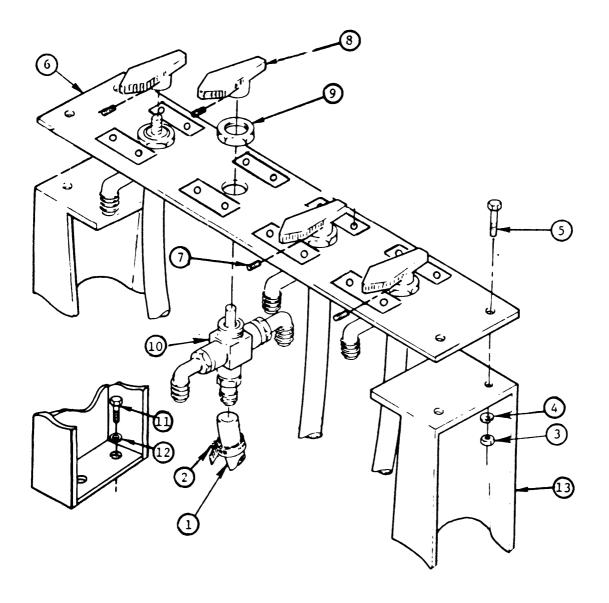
Chemical Feed Pump Frame and Valve Assembly (ARMY)
